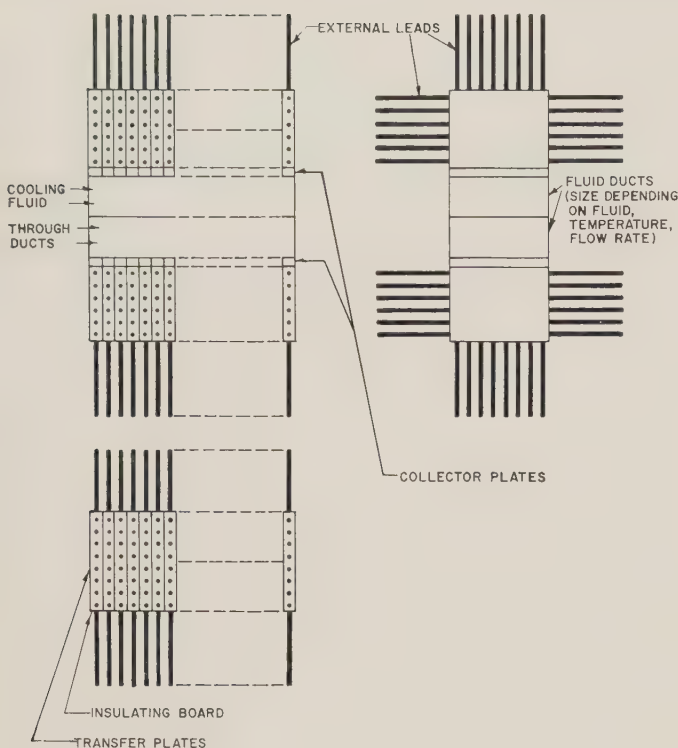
Schematic illustration of a subassembly consisting of a number of modules, each composed of a component board and its transfer and collector plates, all attached to a coolant duct.
